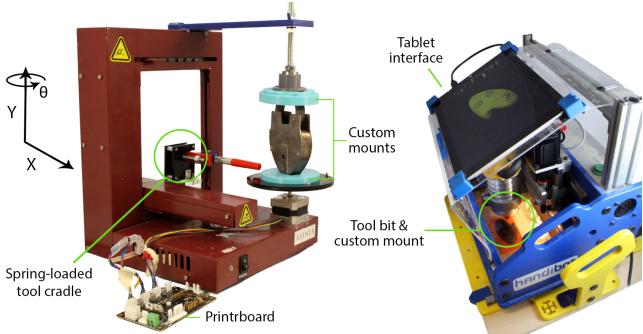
Our custom CNC decorating machine (left) uses repurposed servos and an open-source control board. It has spaces to mount 3D printed object holders to ensure object stability, and our spring-loaded tool cradle can accept engraving, drawing, or painting tools. We also use a HandiBot (left) to engrave in 2.5D.
